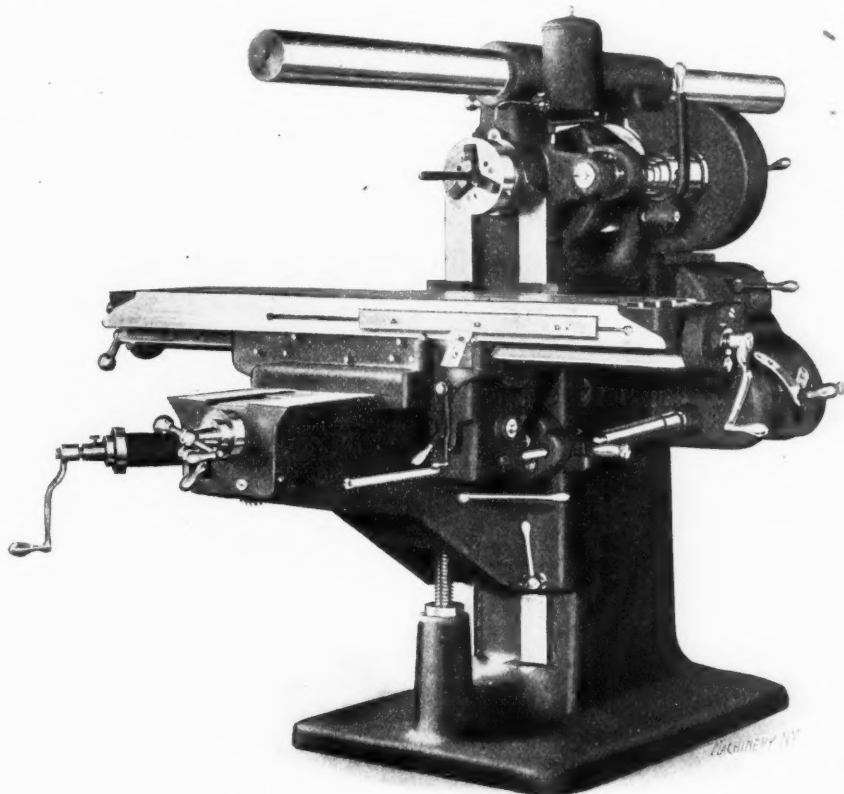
Miller provided with Vernier Gages and other Conveniences for Jig Boring
